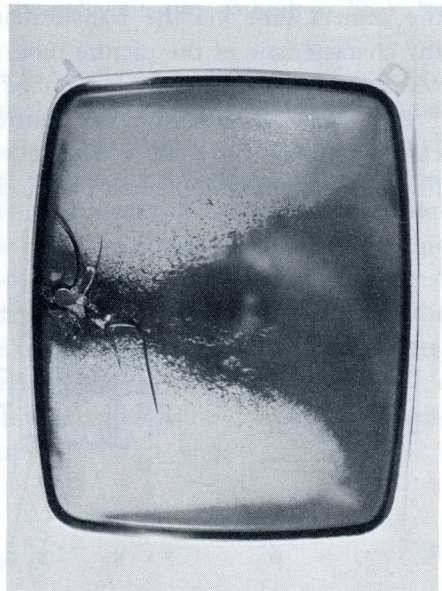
Reinforced tube with a hole hammered in near the edge.
